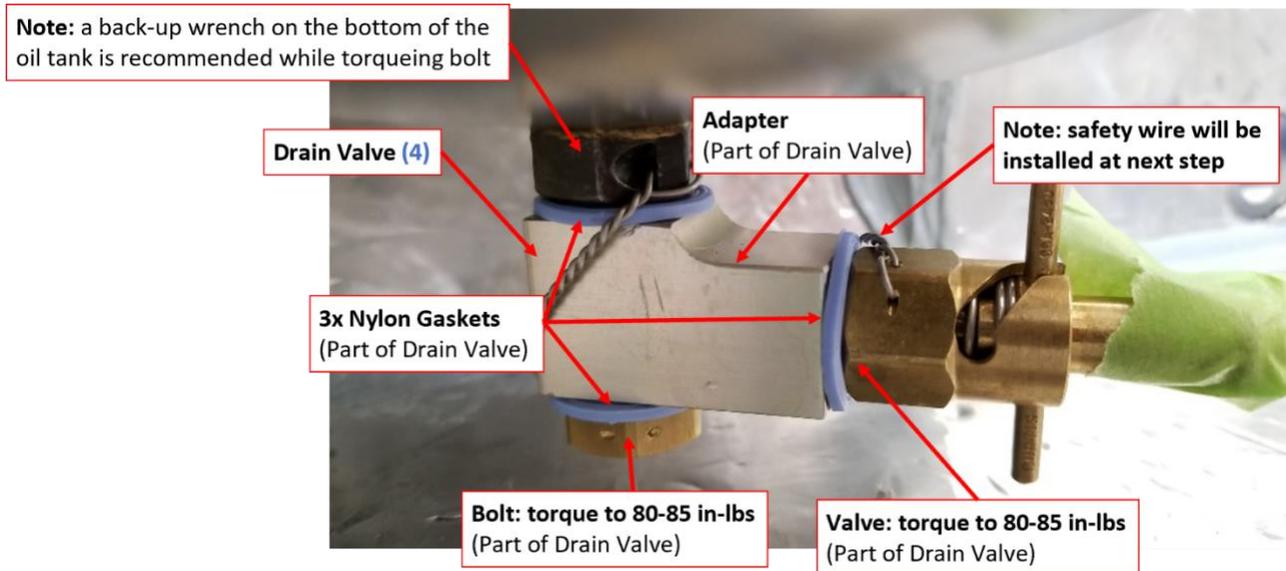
Oil Tank Drain Valve and Bolt Location and Torque Specification
